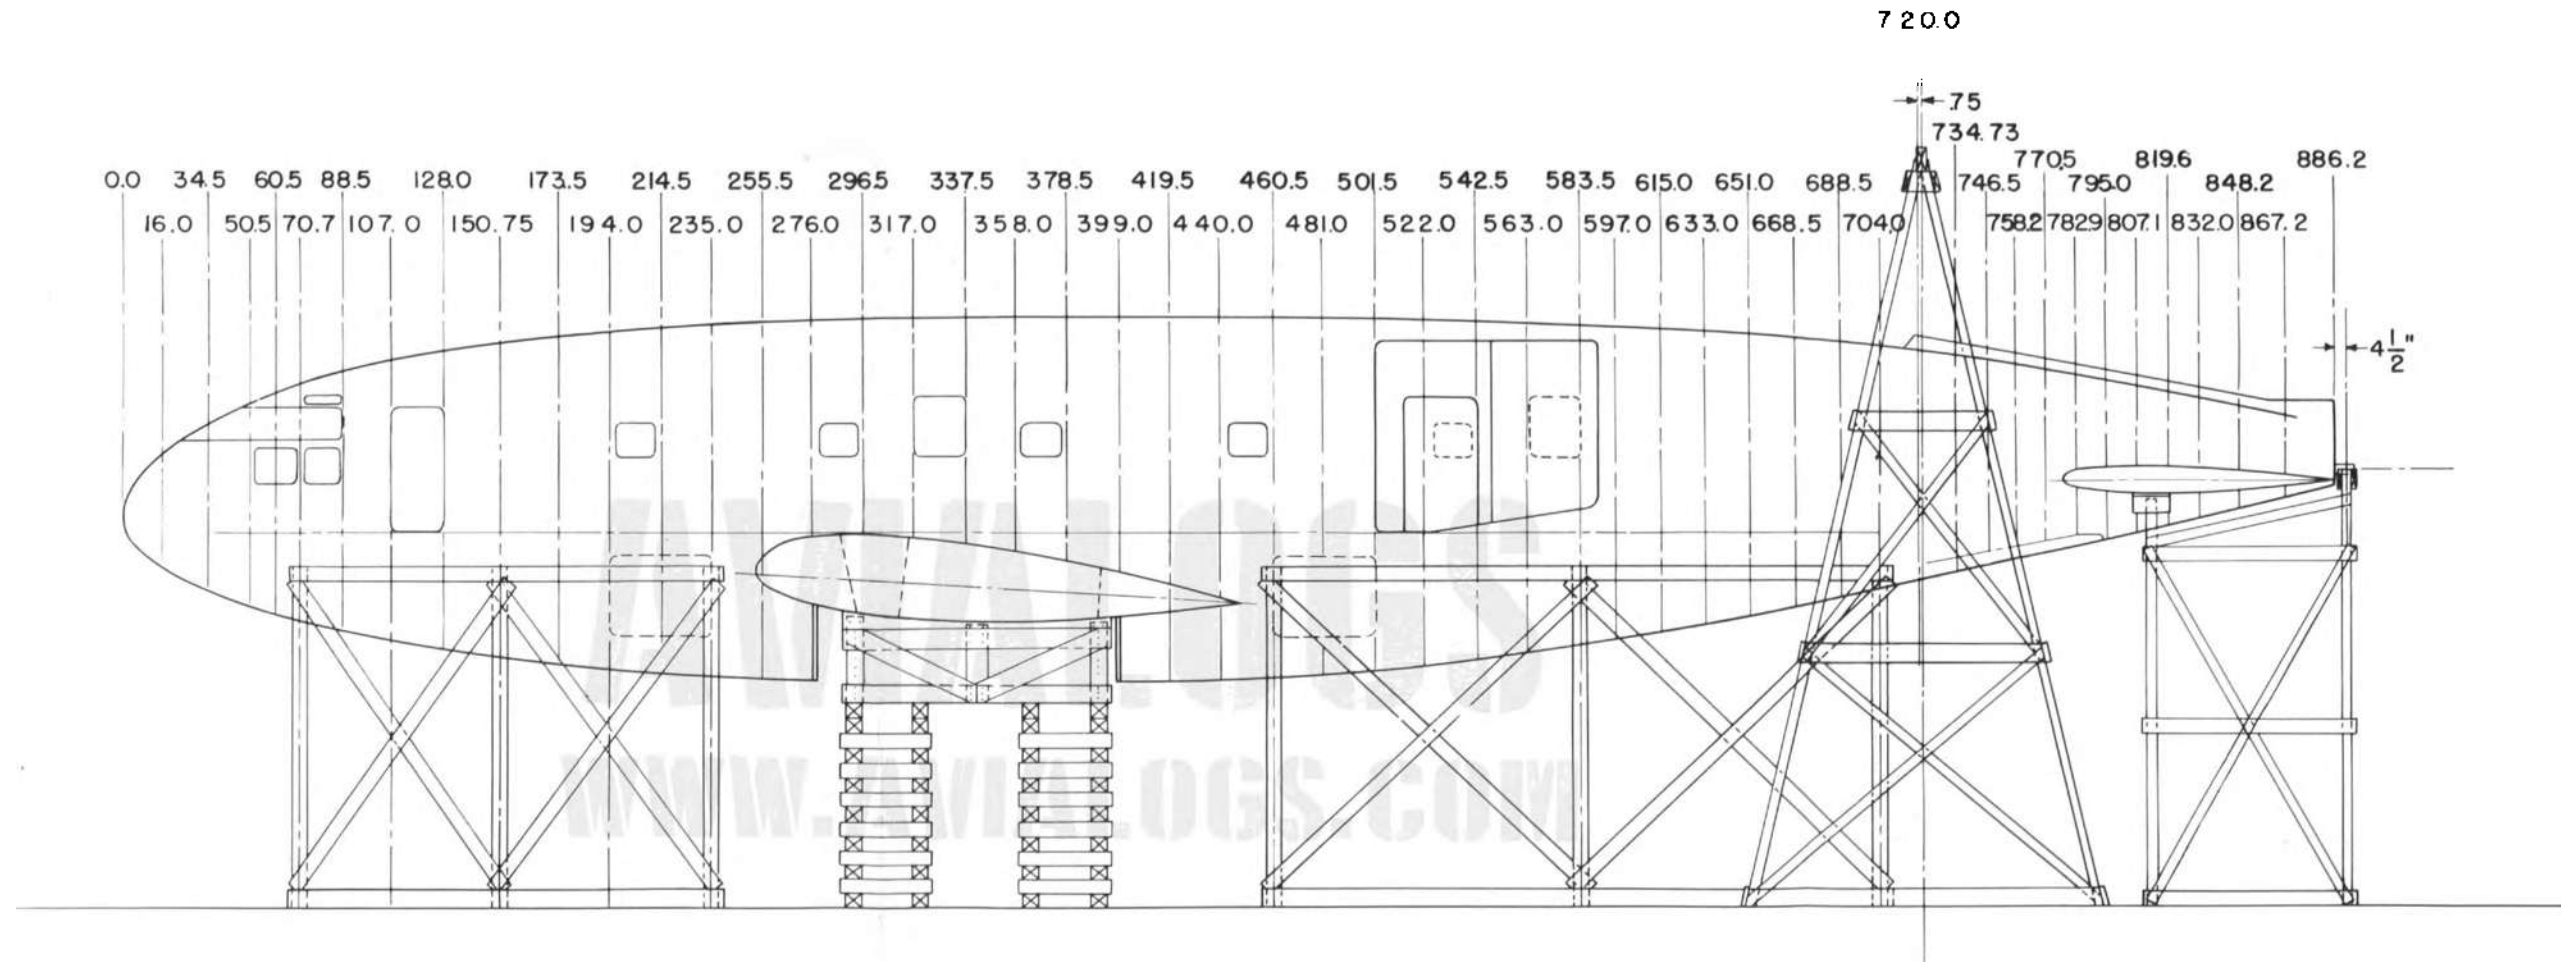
DISASSEMBLY JIGS IN POSITION
